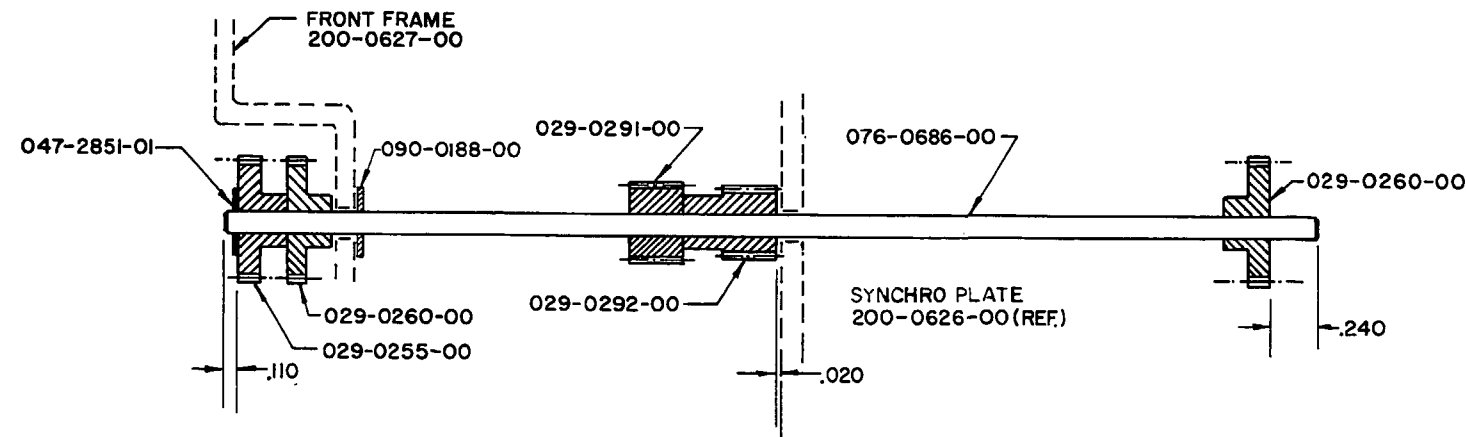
A KI 525 FRONT DISPLAY ASSEMBLY
